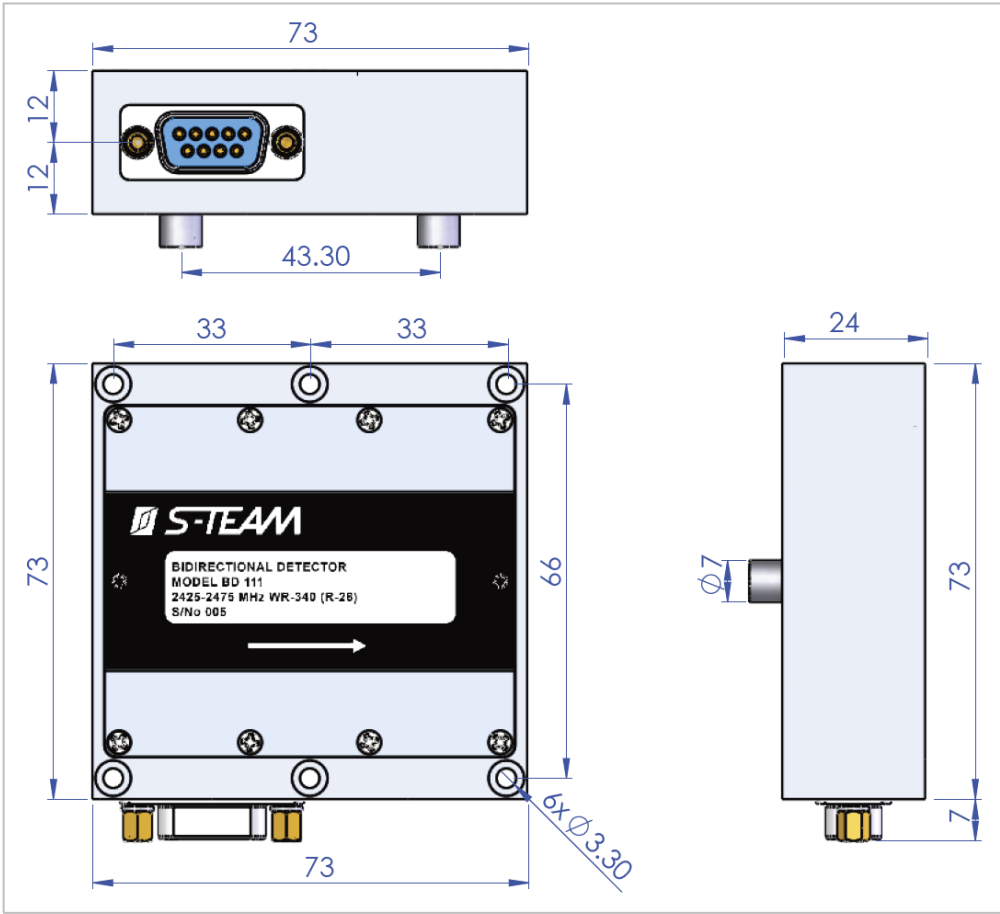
Basic BD111/BD111T dimensions. All dimensions are in millimeters. The probe protrusion is 5.5 mm.
